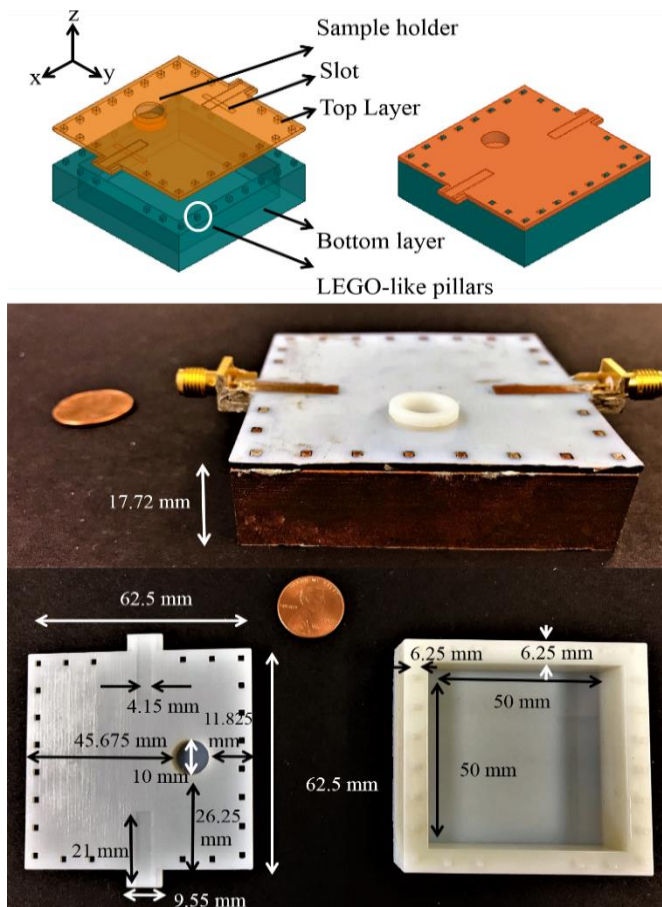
Schematic and image of the 3D printed rectangular cavity with dimensions.
